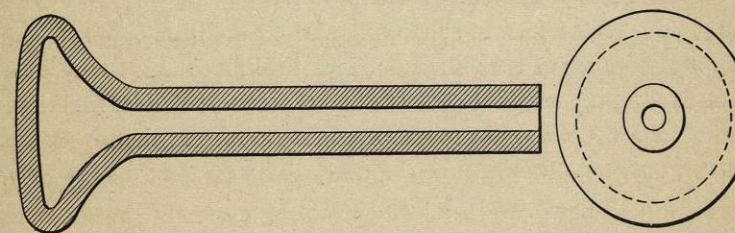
Gas engine valve. A casting that is apt to give trouble from blowing of the core.
